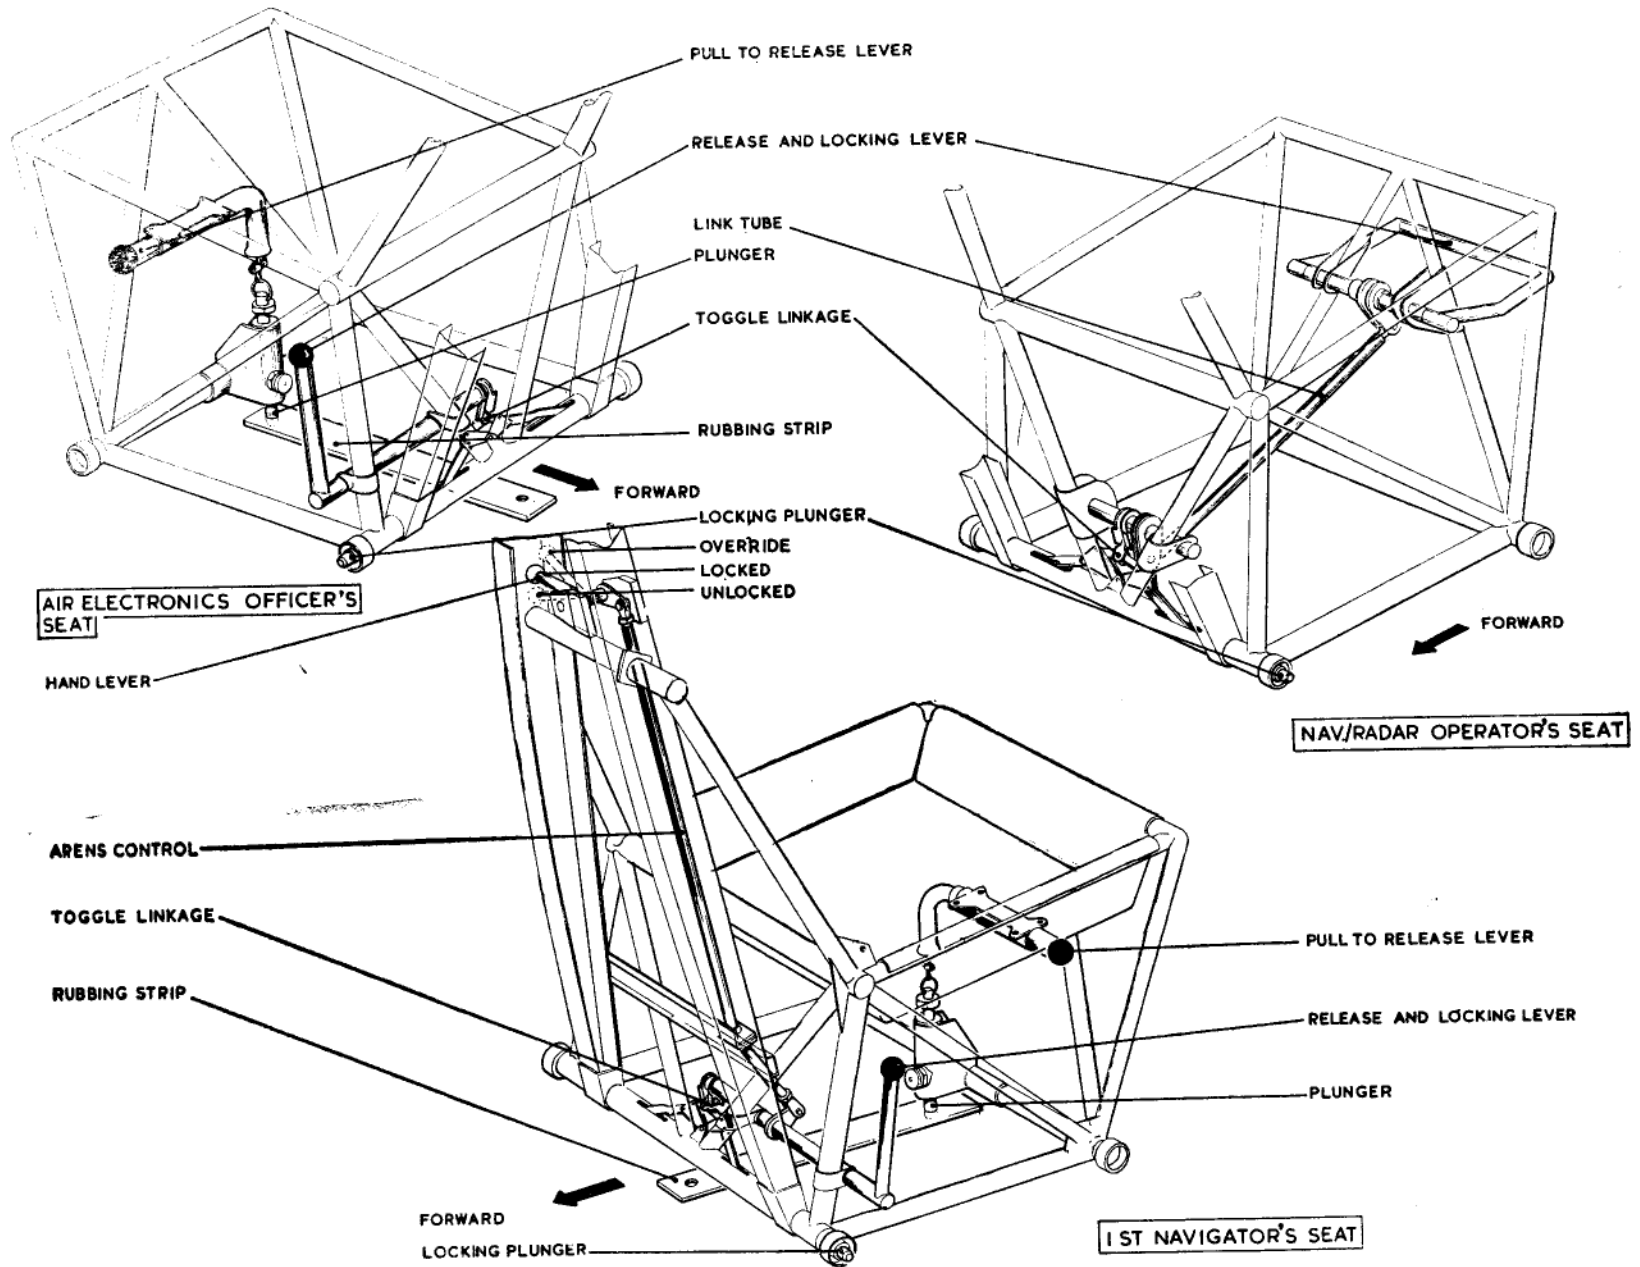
A. Seat locking mechanisms Mod. 2878, 2879
